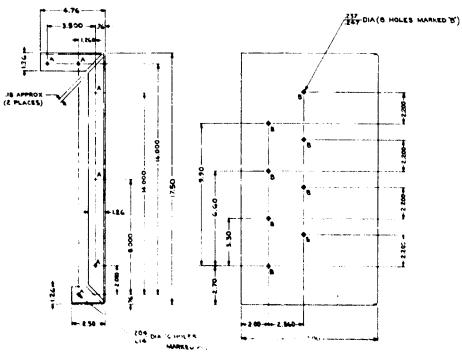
Control Unit Front Panel Drilling (C2205213)
